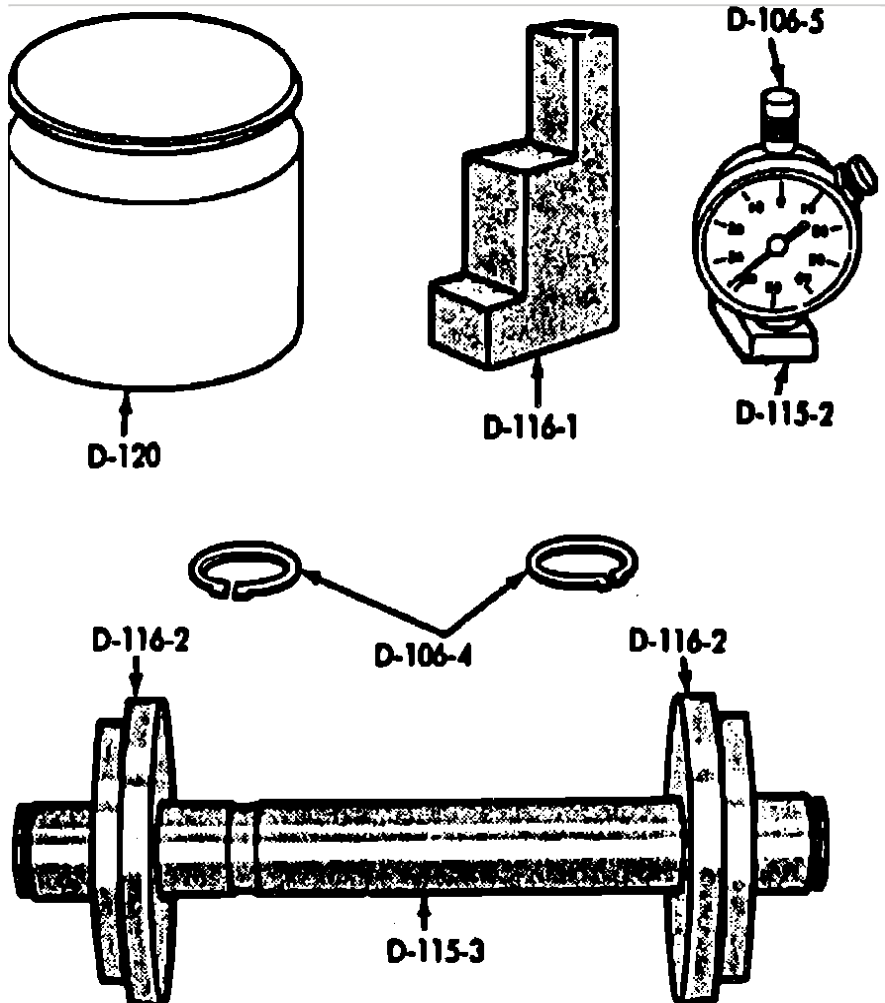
Pinion depth gauge assembly. Rear mounted model 60
